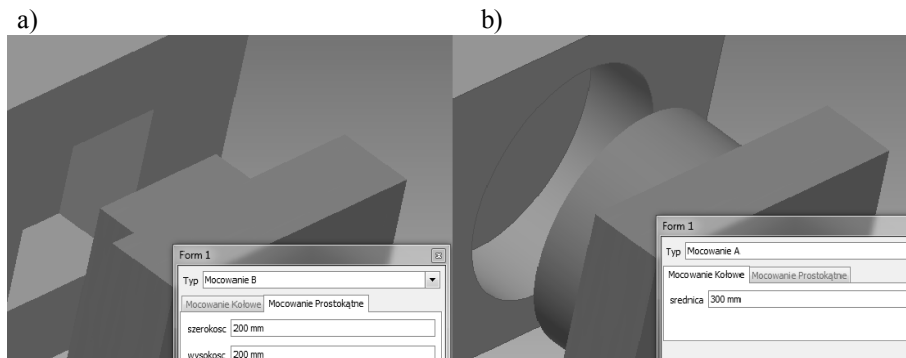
Change of the type of fixtures between elements with the use of logical tools: a) fixture with the use of dado, b) fixture with the use of wheel key
